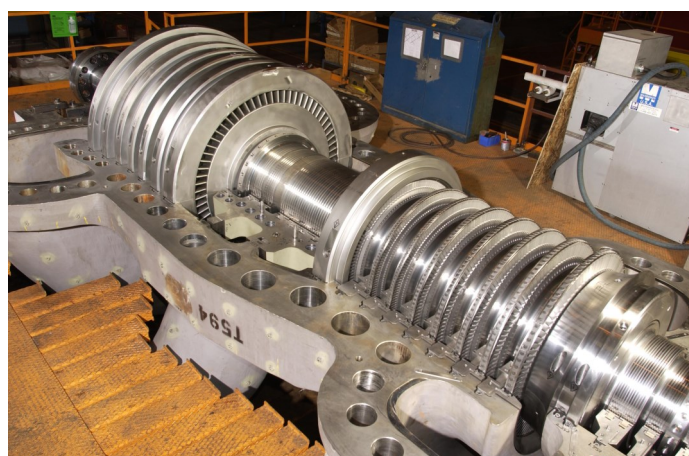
D11 steam turbine HP/IP rotor after diaphragm refurbishment and reassembly
